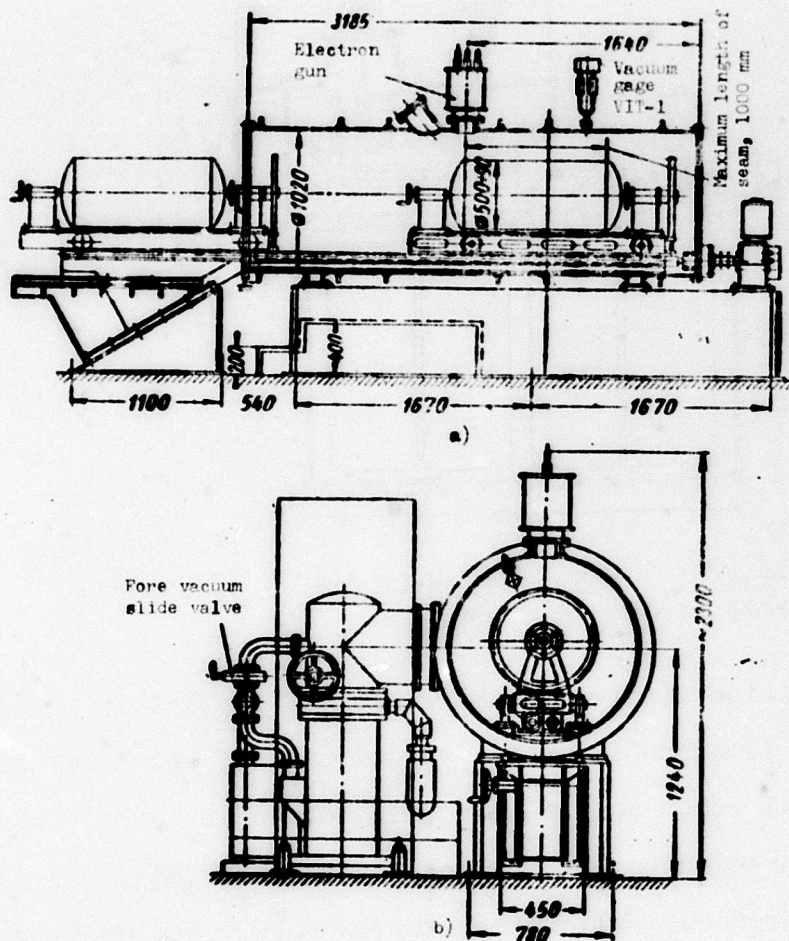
Cross section of vacuum chamber of experimental unit R971 of Institute of Electric Welding imeni Ye. O. Paton: a) Longitudinal; b) transverse.
